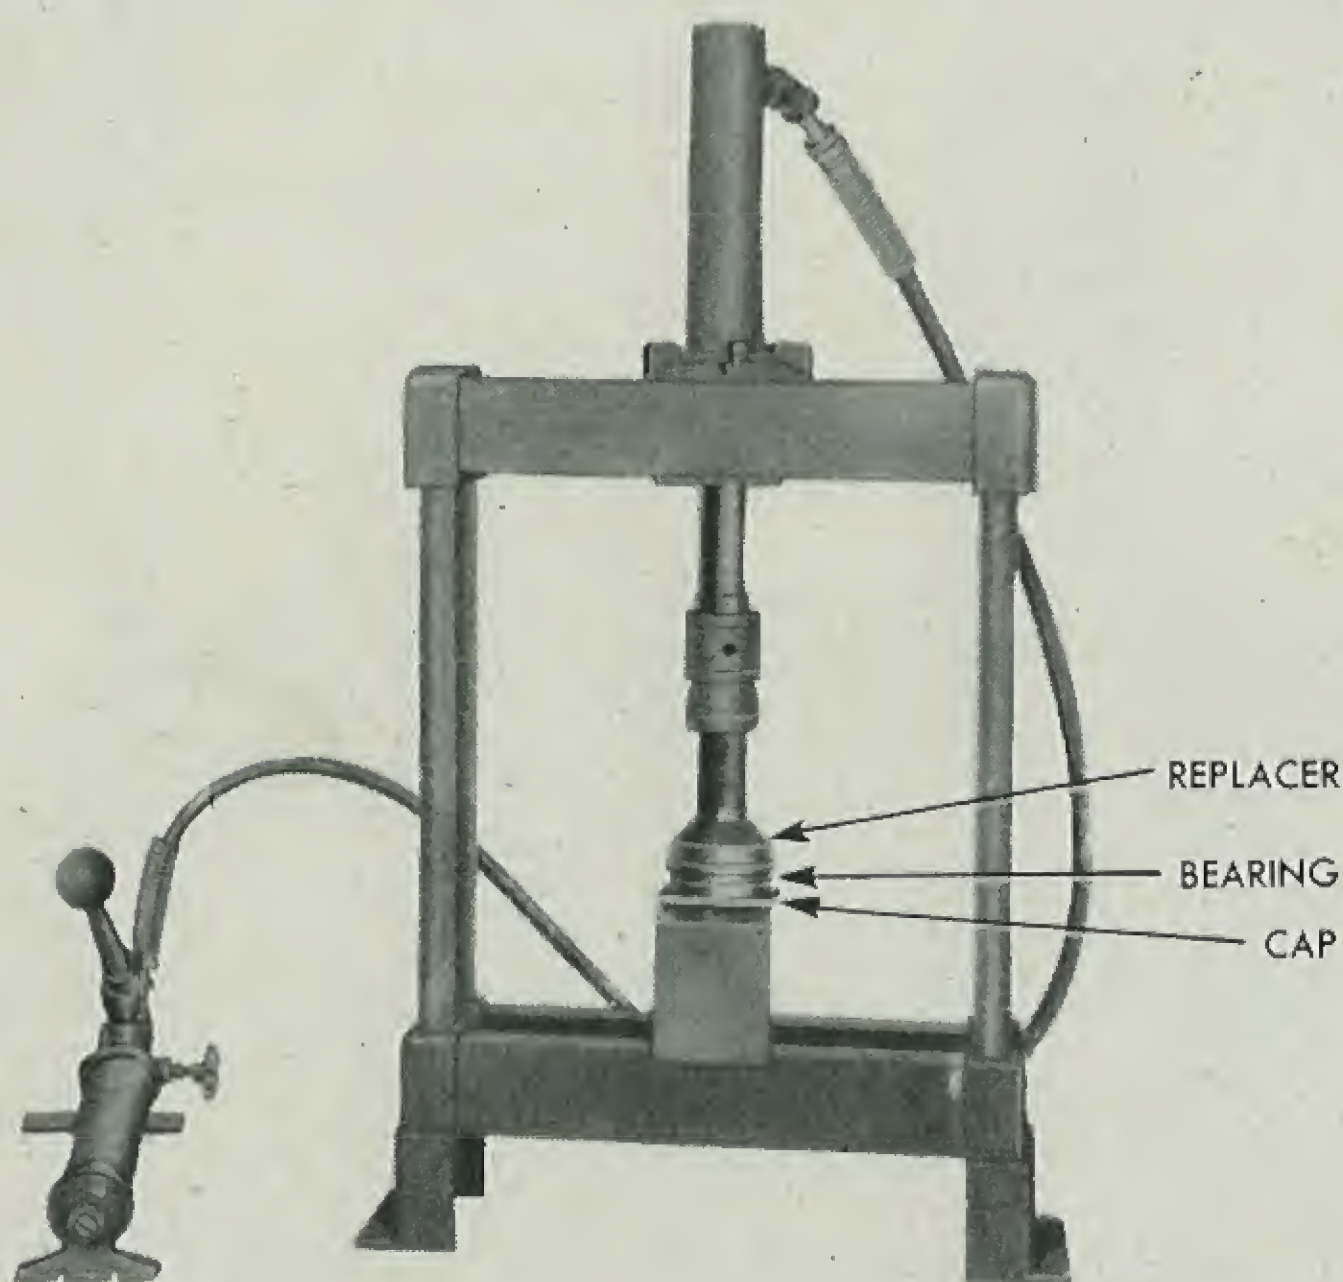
Driving Countershaft Front Bearing into Case with Bearing Replacer 41-R-2397-72
